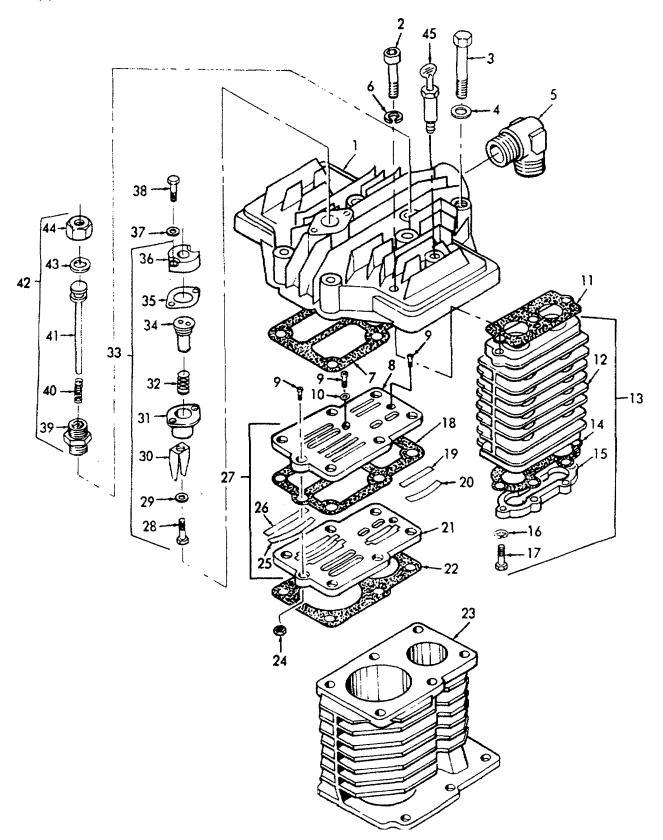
Compressor Valves and Cylinder Head, Assembly.
